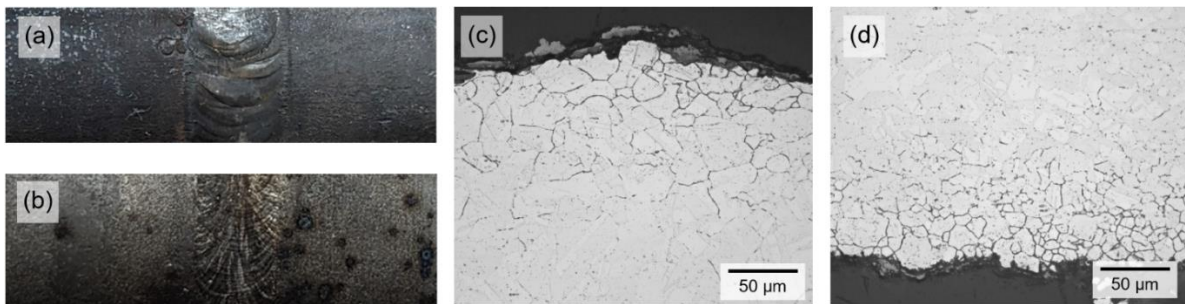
Welded joints and their (a) macrograph of the outer surface, (b) macrograph of the inner surface. (c) Weld A-58 corrosion near the weld, outer surface and (d) weld A-1 corrosion near the weld, inner surface.
